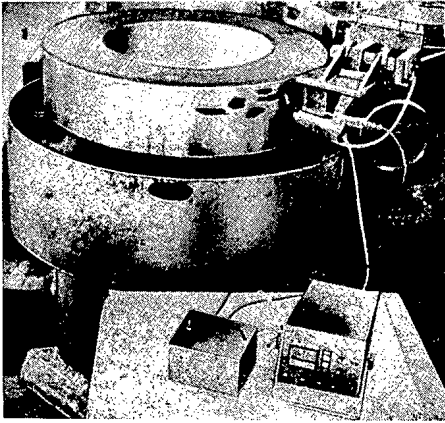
Automatic device for electromagnetic inspection of shells during the machining process.
